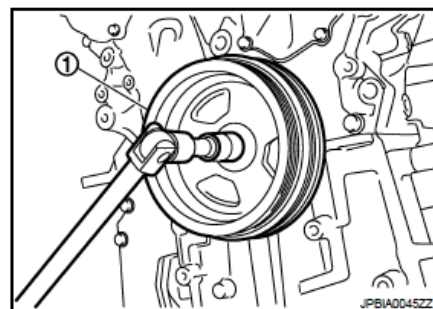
View Of Crankshaft Pulley Bolt Removal
